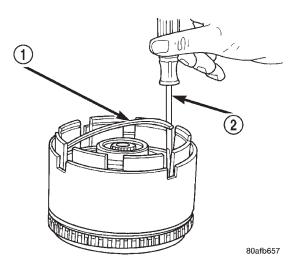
Remove One UD Clutch Disc 1 – ONE UNDERDRIVE CLUTCH DISC
